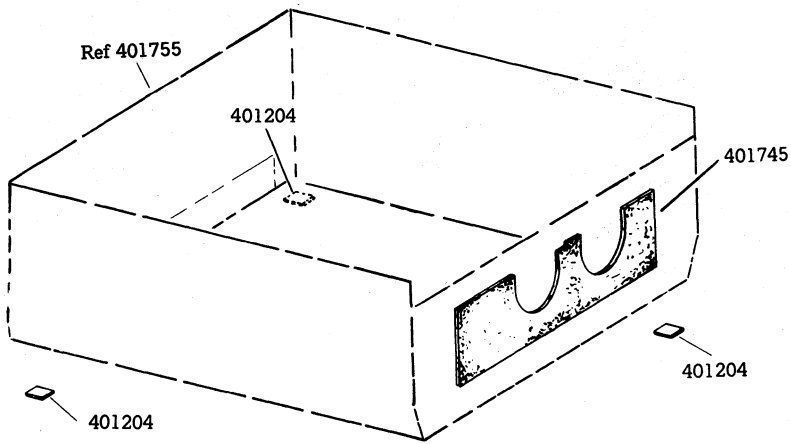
40CAB201/ZZ Printer Cabinet Core for Adjacent or RO Friction Feed Printer (Cont)
